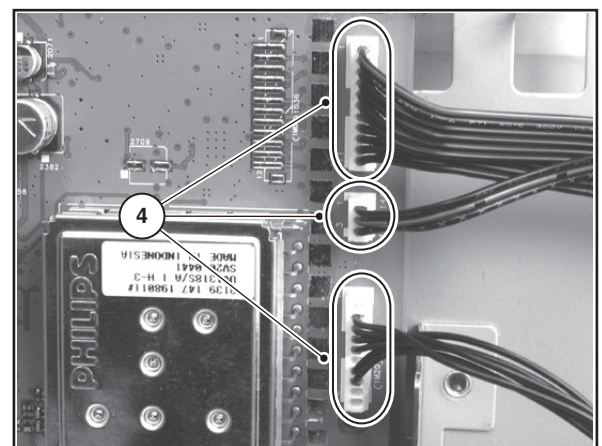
Connectors for side I/O panel, keyboard control panel, and LED panel on TV & scaler board - Photo C
